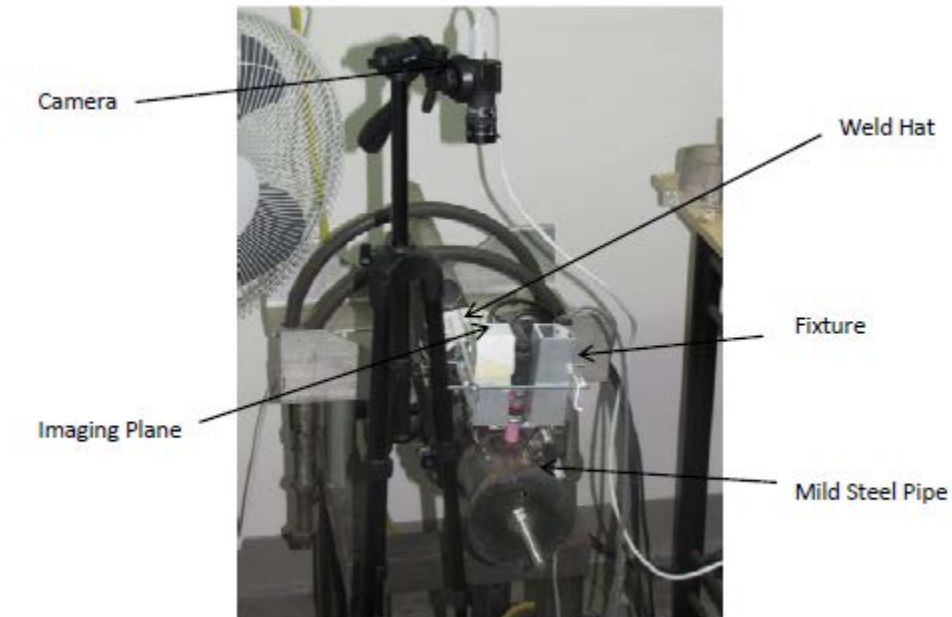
shows the CVS on an orbital pipe welding platform. The orbital platform has the pipe fixed, and a motor in the weld hat causes the torch to orbit the pipe. Two pipes can be inserted on the platform, and the torch can make one revolution around the pipes during welding to join the two pieces.
